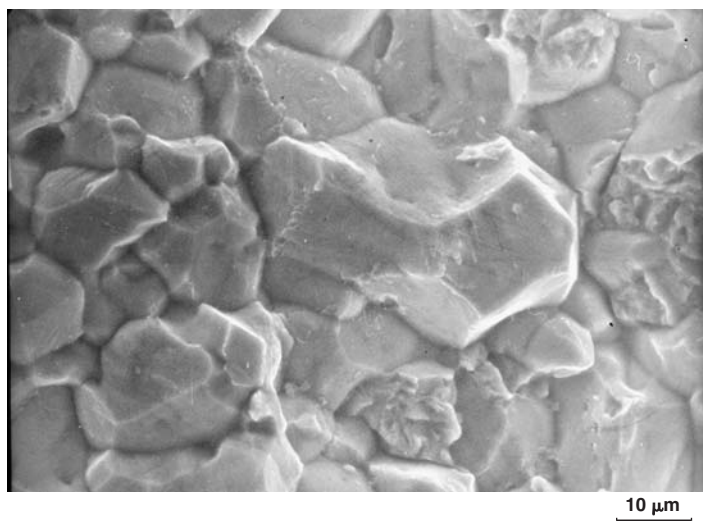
Intergranular fracture in the dull gray area shown in Fig. CH20.2
